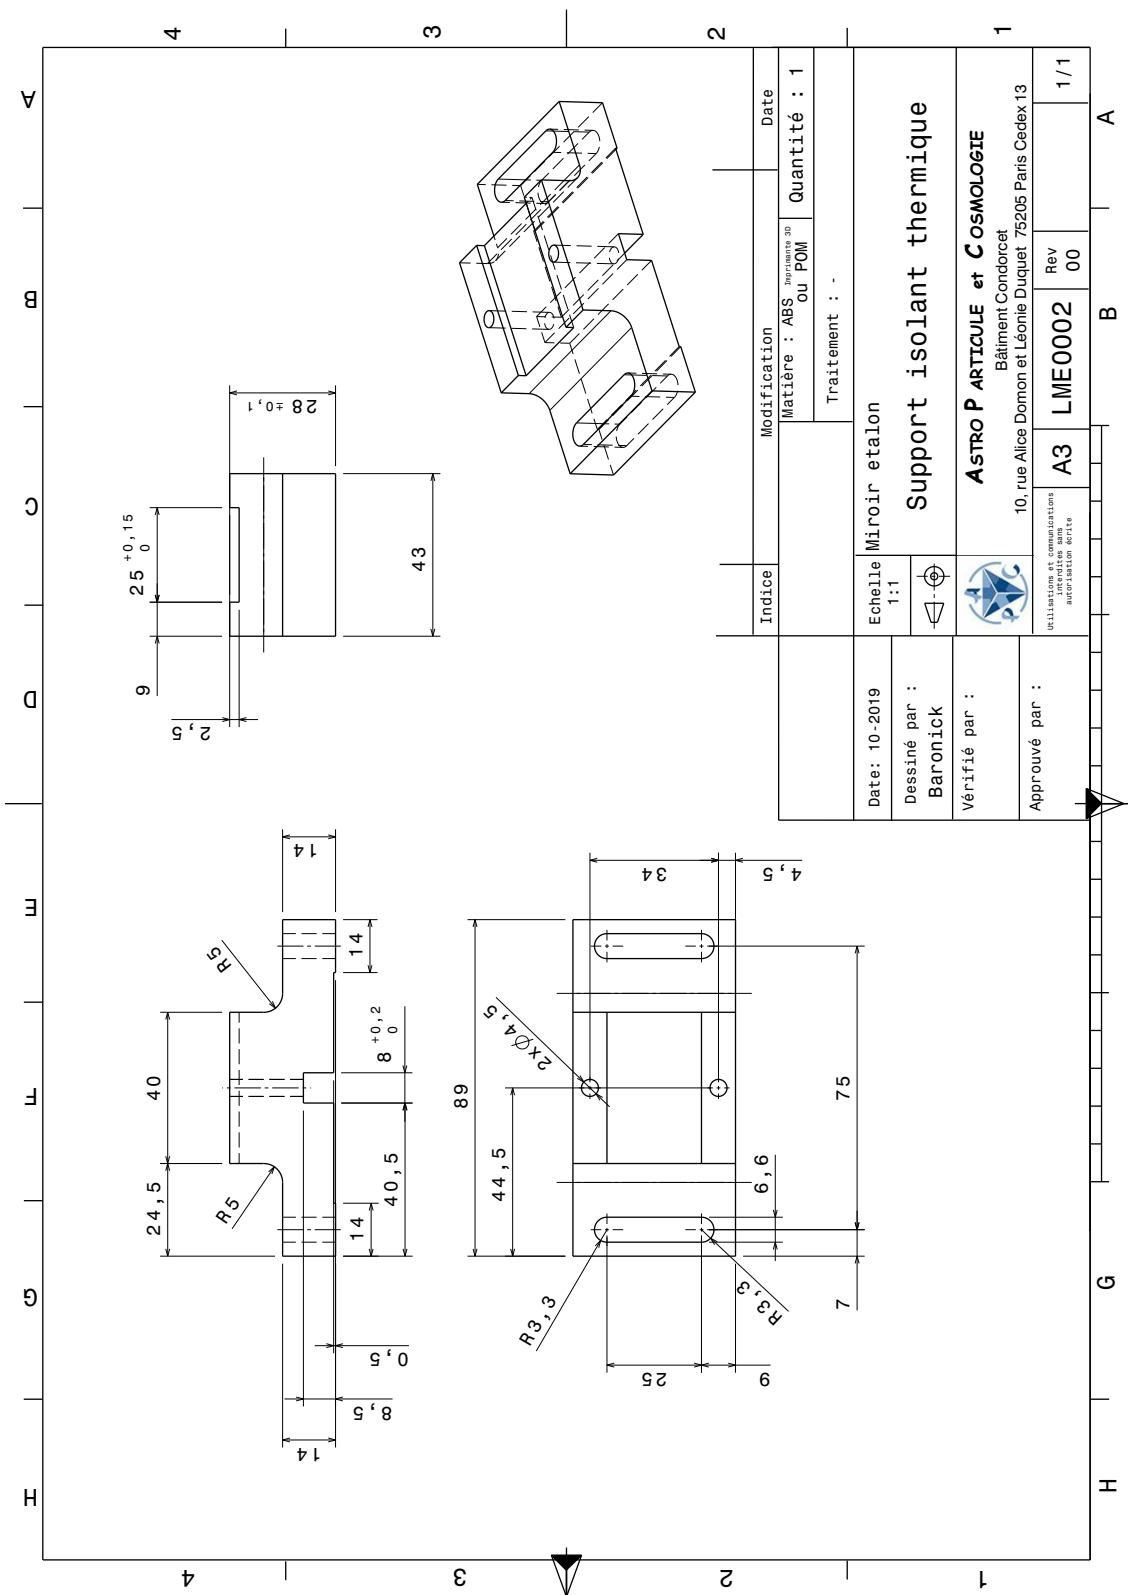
Mechanical drawing of the base in ABS, by Jean-Pierre Baronick.
